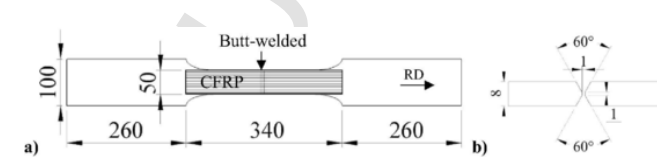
Schematic of tensile specimens. a) Butt-welded with adhesively bonded CFRP (RD stands for steel's rolling direction), b) the double-V groove shape for GMAW. (Dimension in mm, not to scale).
